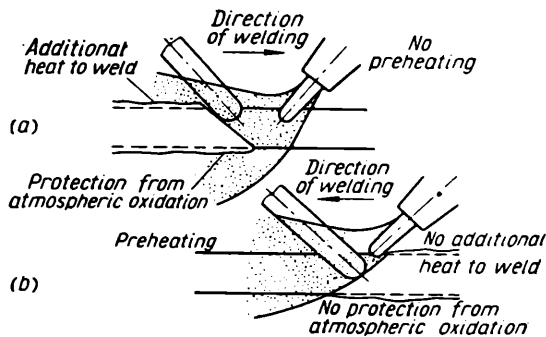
(a) Rightward (backhand) and (b) leftward (forehand) techniques of welding
